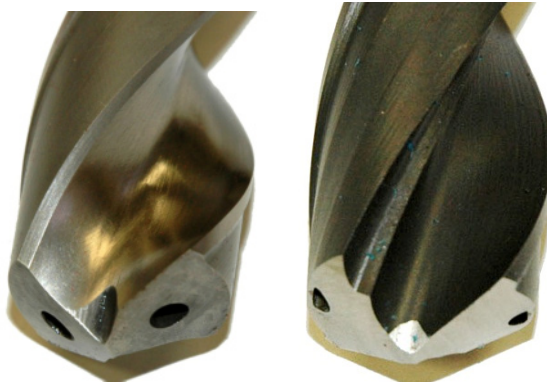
Coarse grind of (a) the tool rake, and (b) flank surfaces
